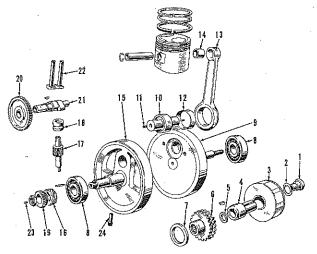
Exploded view of the late type crankshaft and associated parts.
